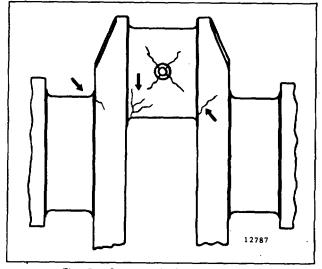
Crankshaft Fatigue Cracks.
